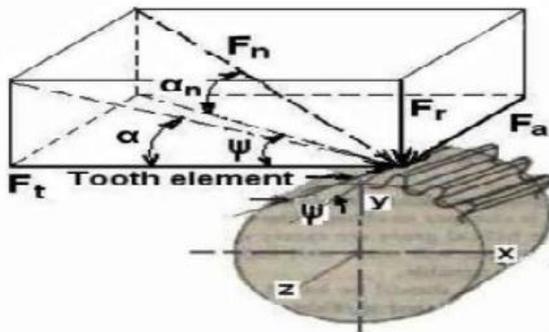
Tooth force and its components acting on a Right hand helical gear [5]
